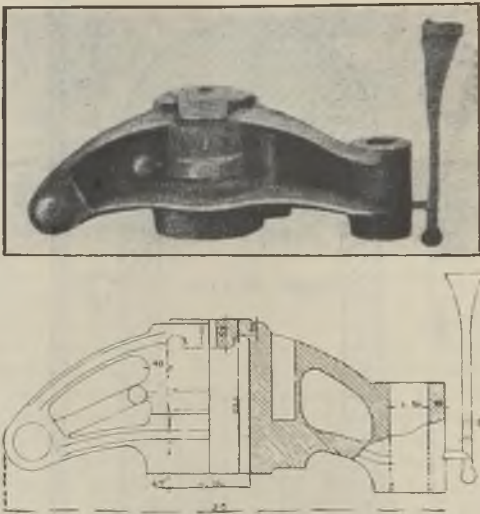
MOULDING MACHINE CROSS-HEAD.
